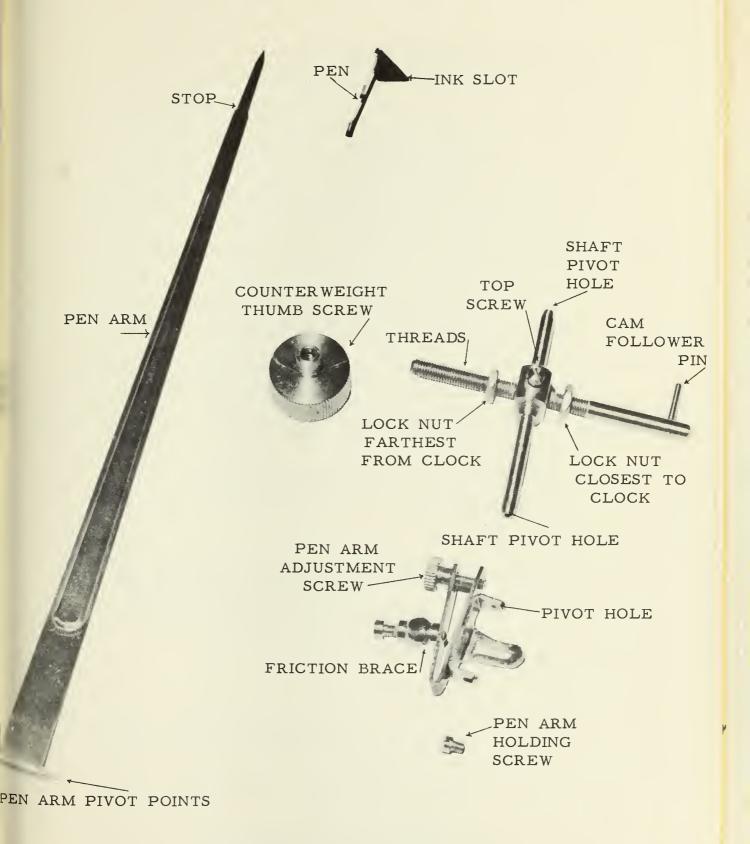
Types A and B. Pen arm -- cam follower shaft, detail of parts.
